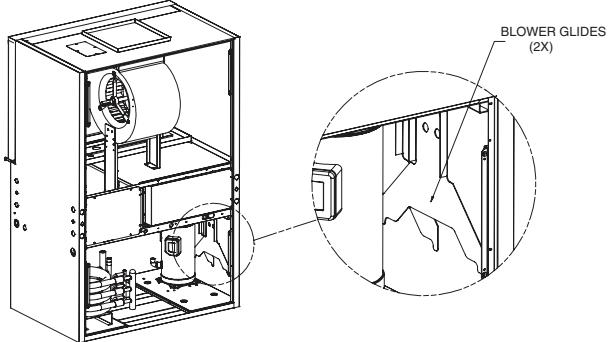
Remove Blockoff Air Handler and Belt
